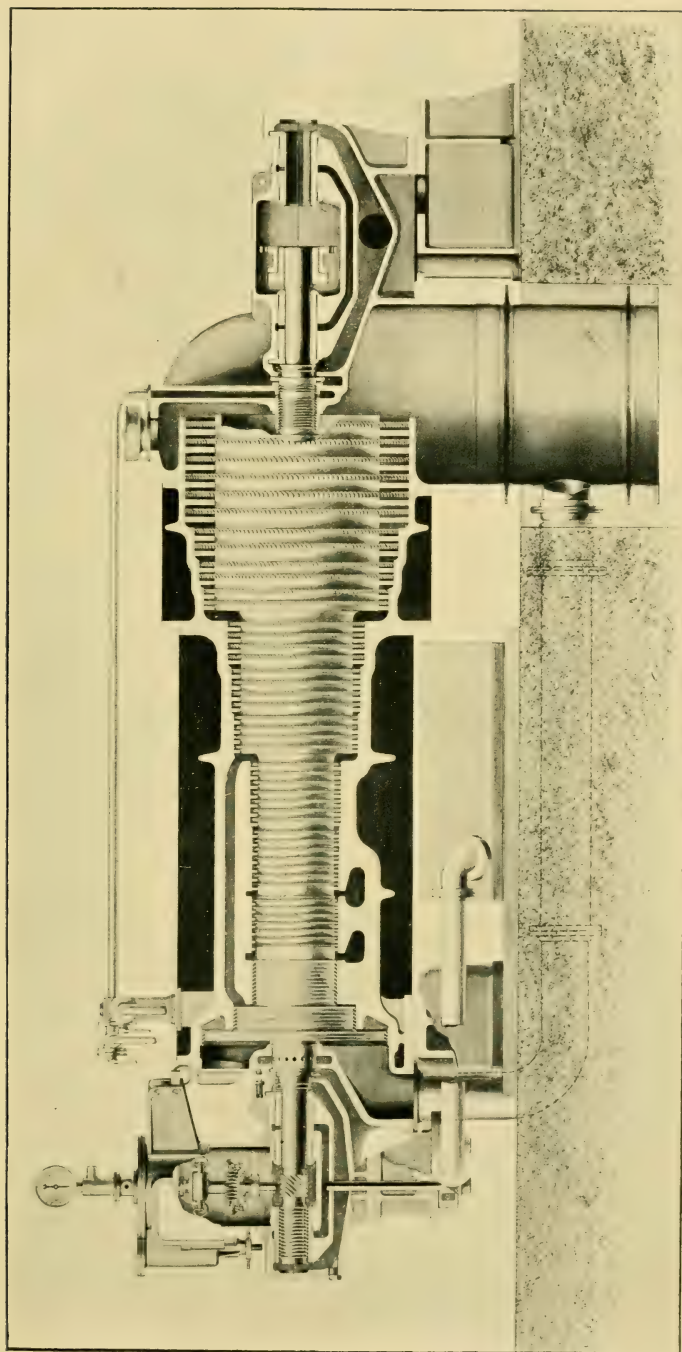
SECTION THROUGH COMPOUND STEAM TURBINE.
